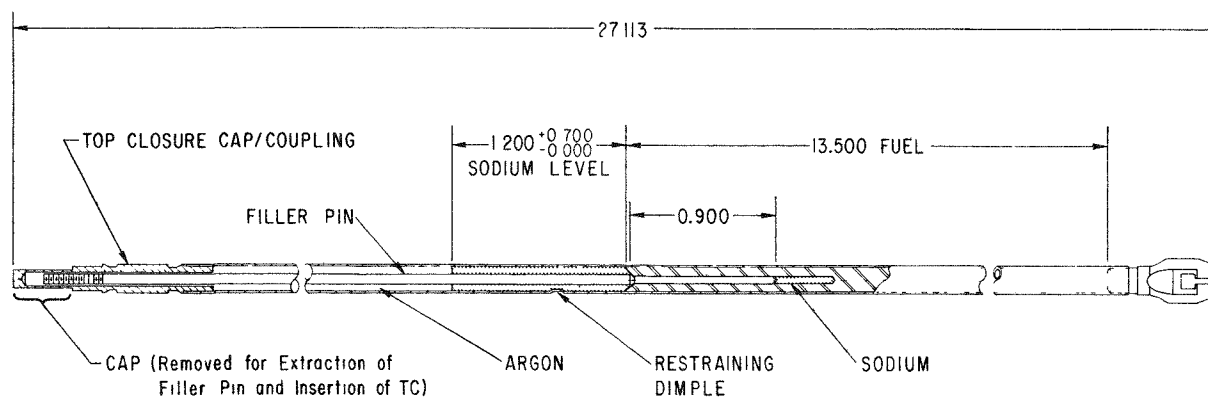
Preassembly for XX08 Fuel Element with Fuel-centerline Thermocouple. All dimensions in inches; 1 in. = 25.4 mm.
